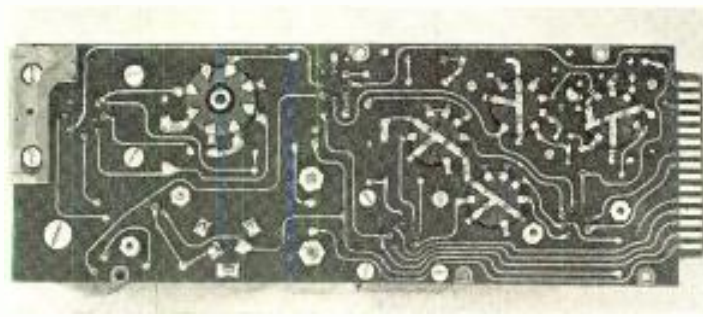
Printed circuit boards have rhodium-plated contact tips
